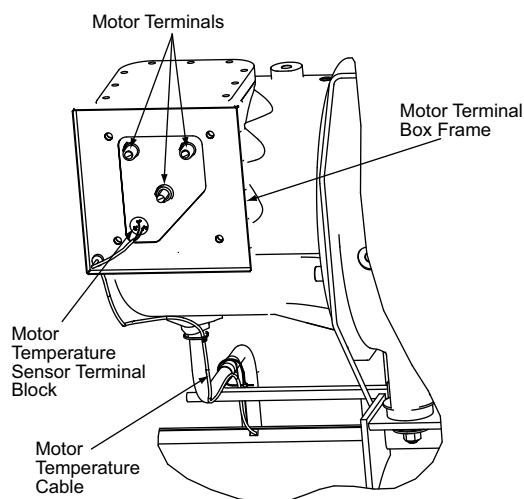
Chiller End View (Q, R Compressors Only)
